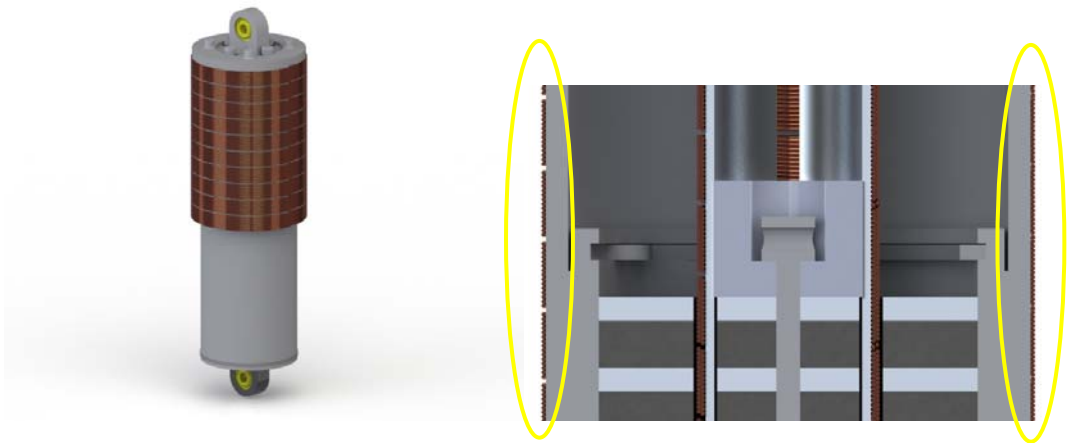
Electromagnetic Damper with Coils on the Outside (Left) and Section View (Right)
